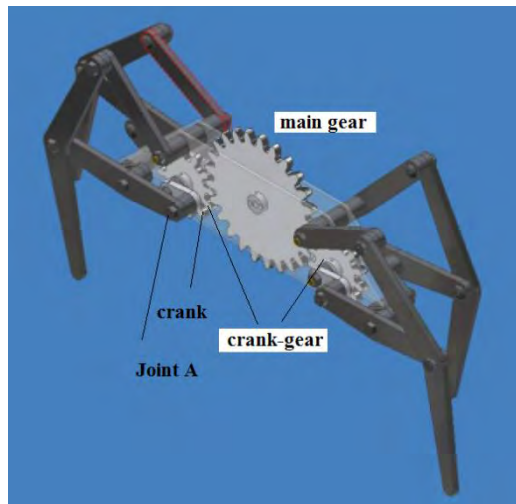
11: The design of Klann mechanism crawler robot [18].
